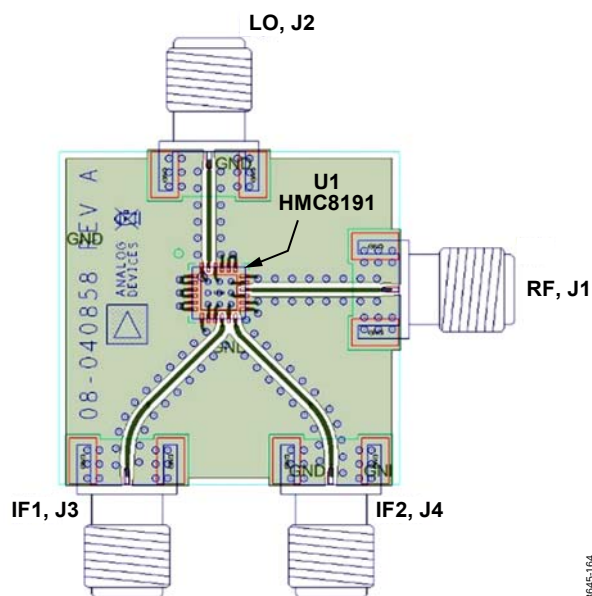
EV1HMC8191LC4 Evaluation Board PCB, Top Layer
